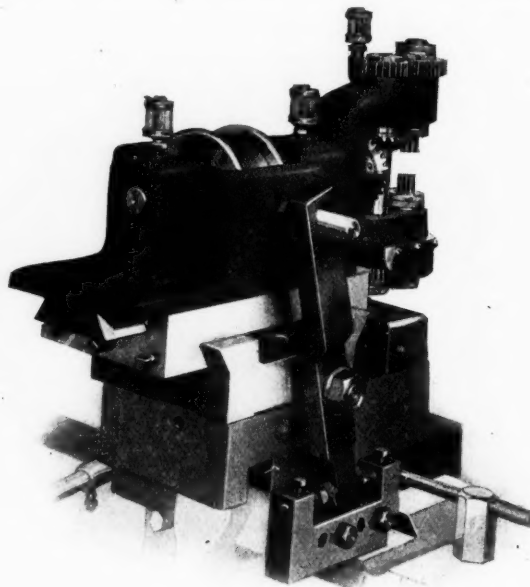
Rear View of Milling Attachment, showing Feed Arrangement
